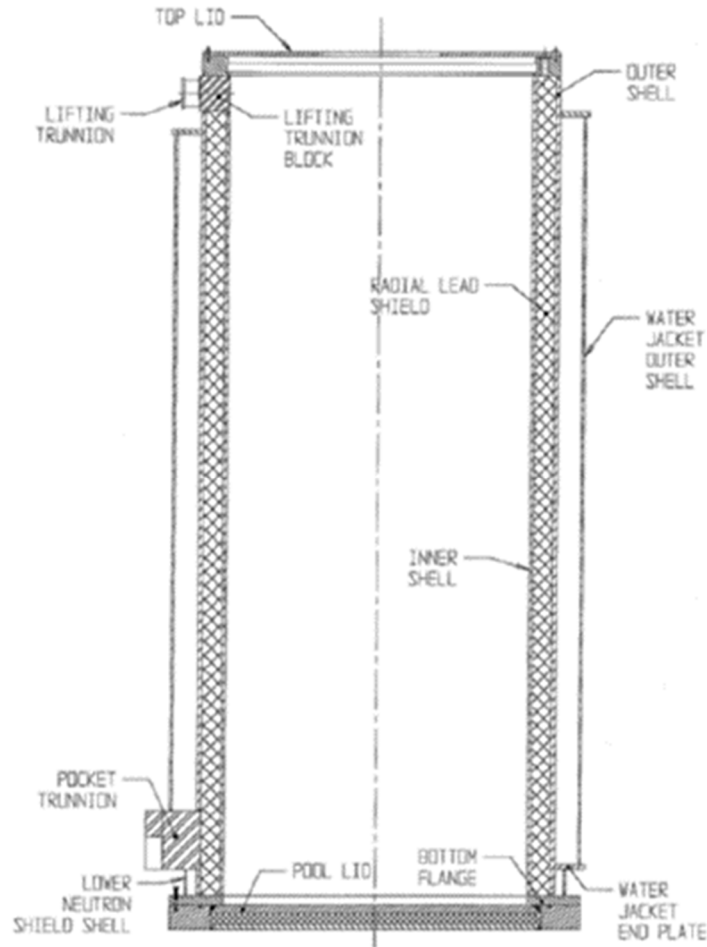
HI-STAR 100 Elevation Sketch [7]
